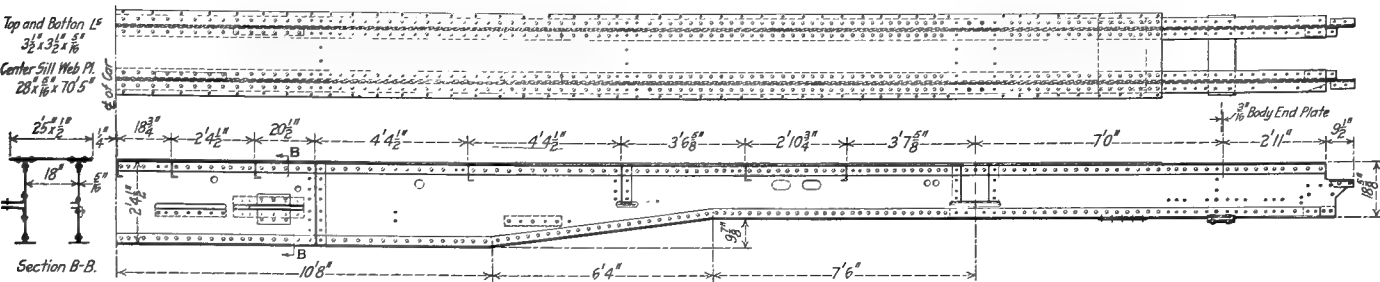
Center Sill Construction of Central Railroad of New Jersey Steel Combination Car and Day Coach Shown in Figs. 144, 382 and 383.
